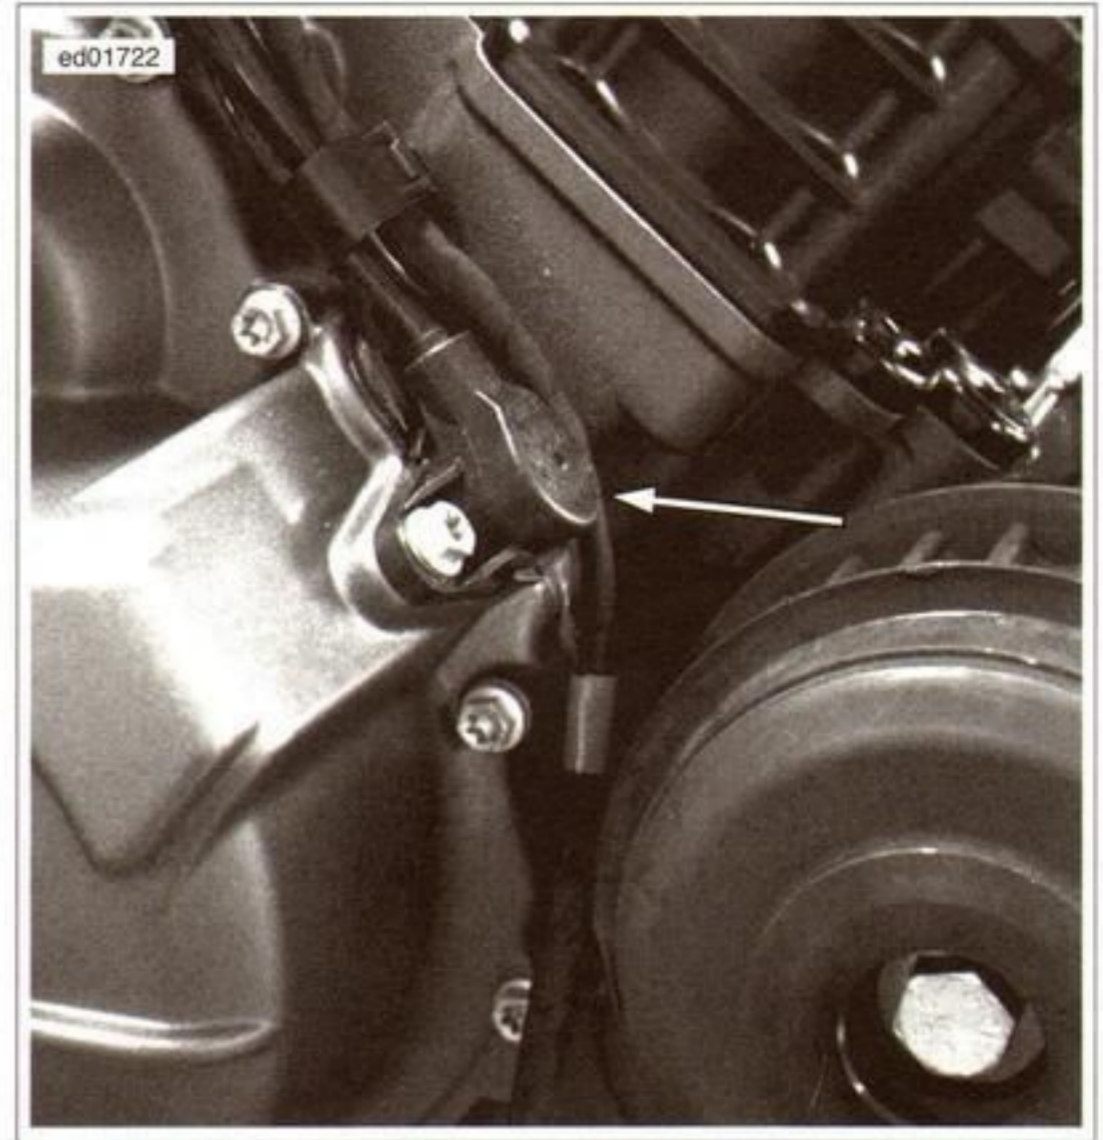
CKP Sensor Location (Shroud removed for clarity.)
